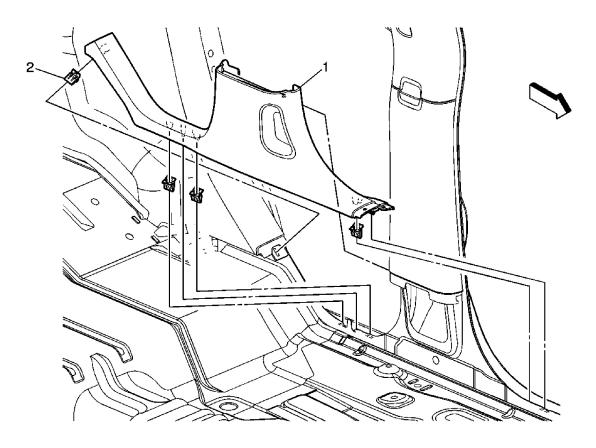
Rear Side Door Sill Plate Replacement Courtesy of GENERAL MOTORS CORP.
